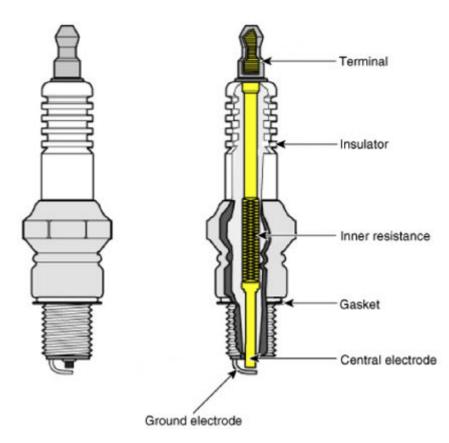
Identifying Spark Plug Courtesy of HYUNDAI MOTOR AMERICA
